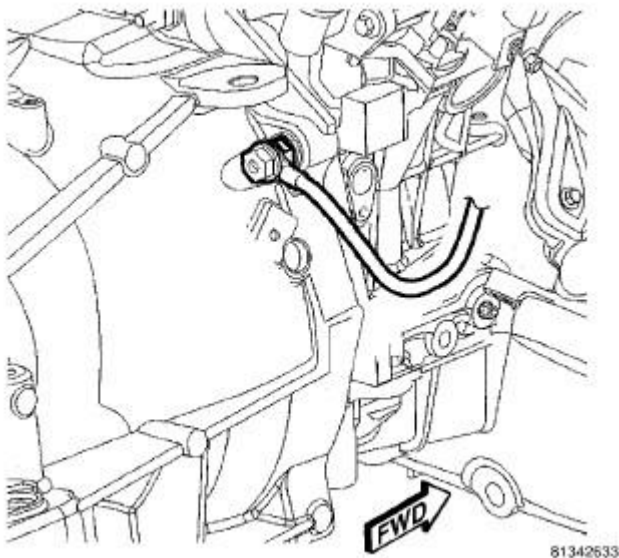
Fastener Securing Negative Battery Cable To Transmission Housing
